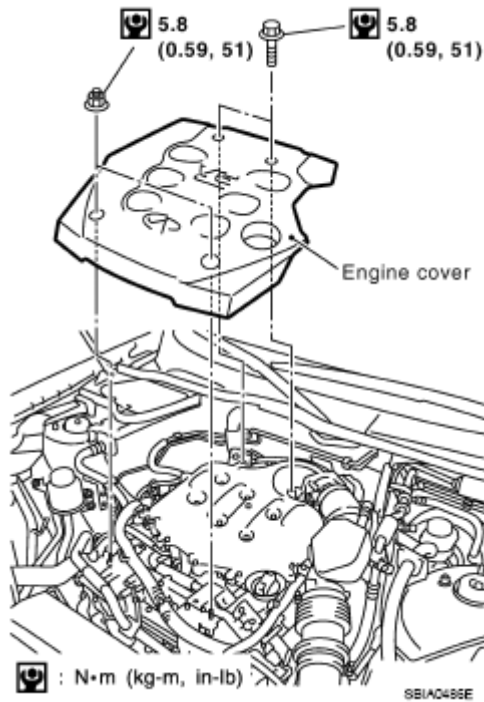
Identifying Engine Cover With Power Tool With Torque Specifications
